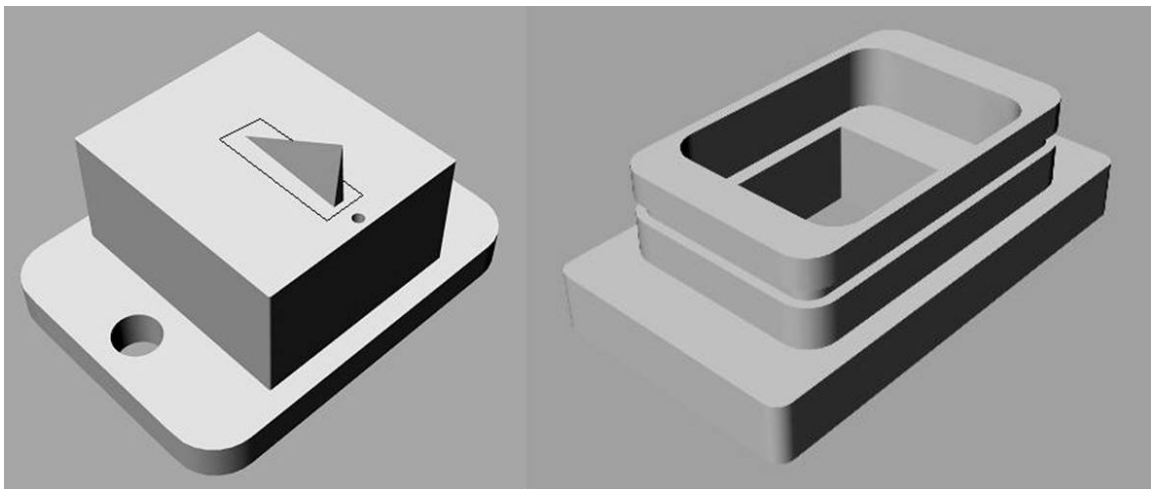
Early concept for pylon inserts showing Fixture B (left) and Fixture A (right) with crevice
